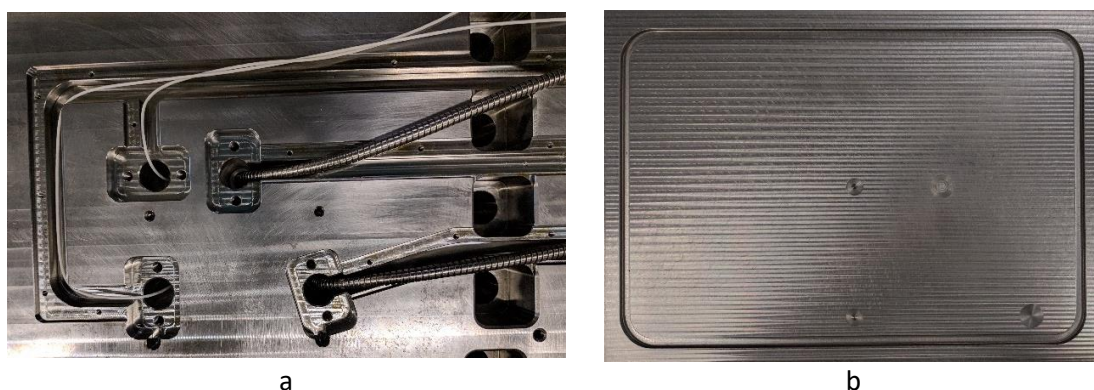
Installation of cavity sensors. a) Sensors cavity in the mold structure (lower mold part). b) Sensors front and location in the mold cavity
